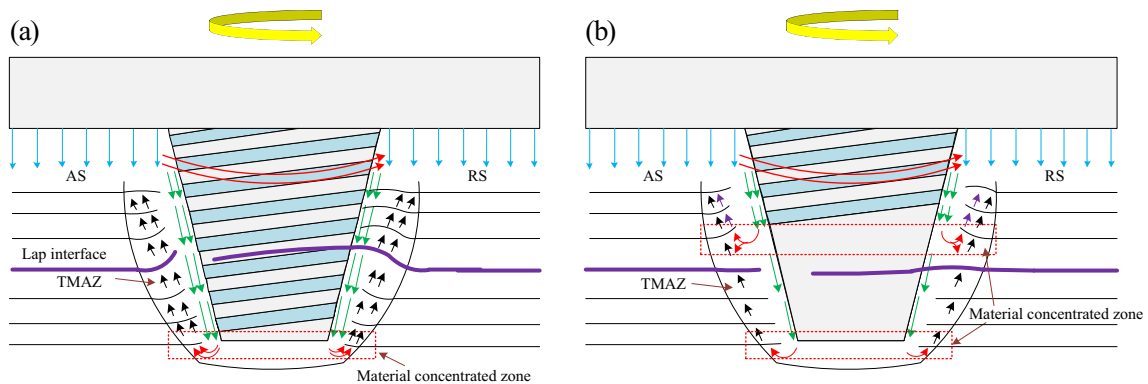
Material flow behavior during welding. a Full-threaded pin. b Bottom-half-threaded pin
